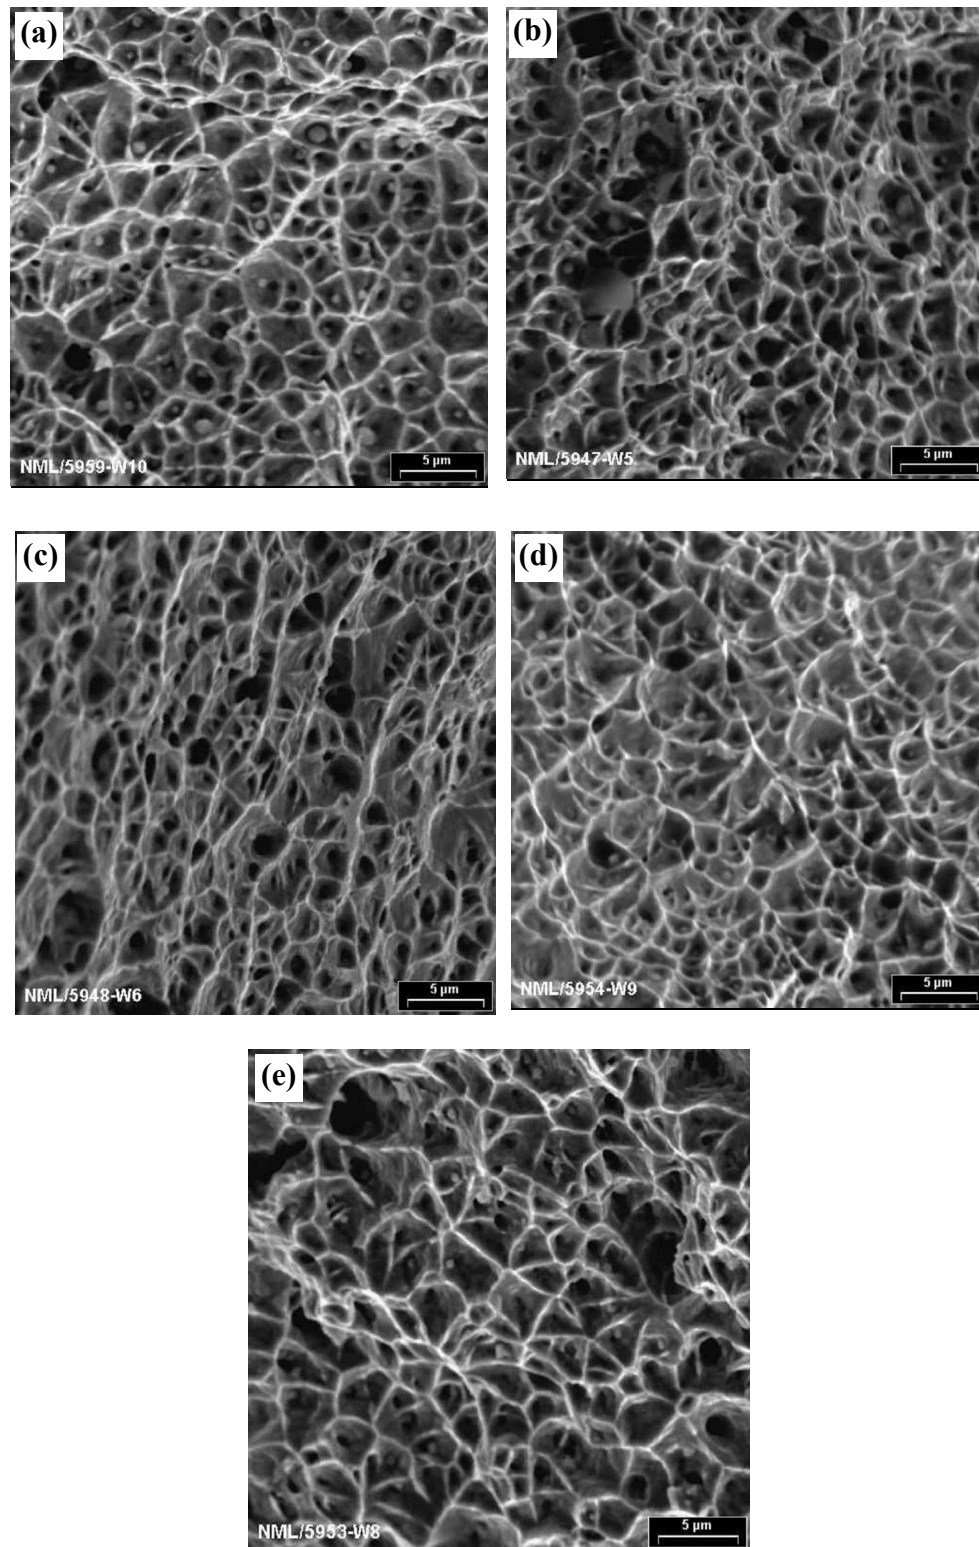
Fracture surface of tensile specimens of AISI 304LN weldments at strain rates of (a) 0.0001, (b) 0.001, (c) 0.01, (d) 0.1 and (e) 1.0 s⁻¹
